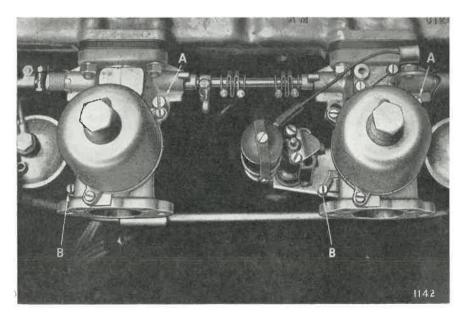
Carburetter adjustment. A—Slow running volume screws. B—Mixture adjusting screws.
